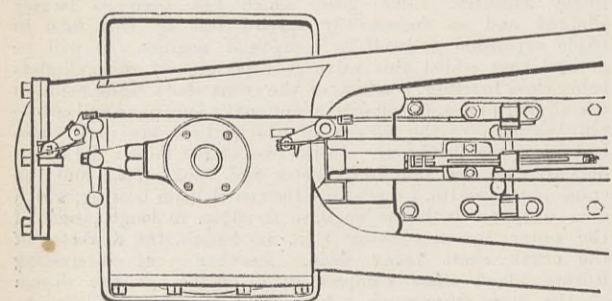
METHOD OF ATTACHING THE INDICATORS.
